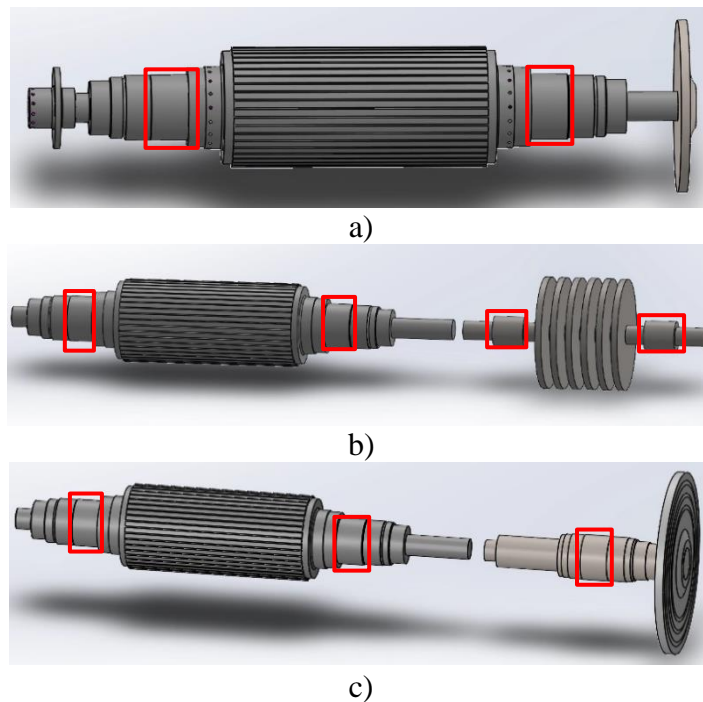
Three different HSEM drivetrain configurations. a) Impeller is attached on the electric motor shaft (DHS drivetrain). b) Impellers are supported with own bearings (stand-alone drivetrain). c) Impeller is installed on extension shaft, (three AMB drivetrain). Red boxes indicate the locations of the bearings.
